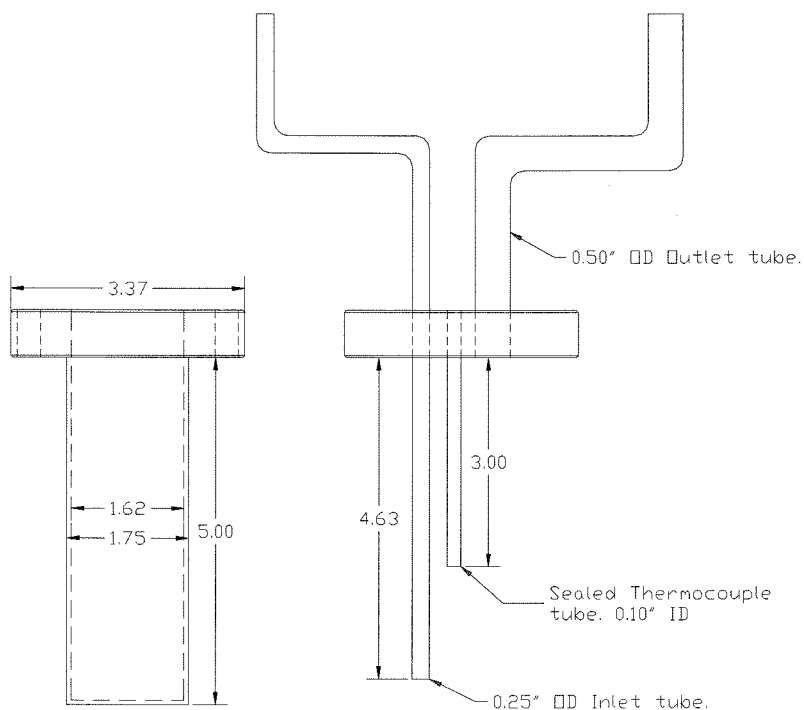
Schematic drawing of the bubbler depicts the canister and lid assembly.
